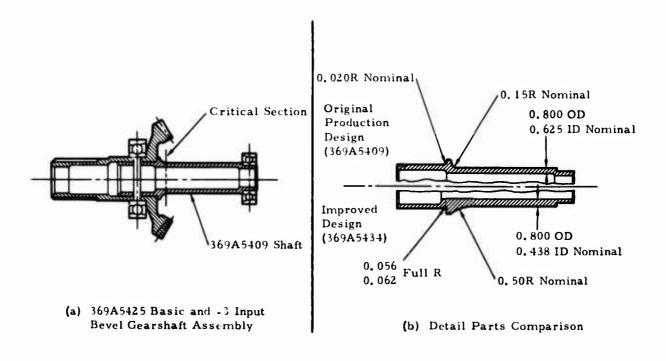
Design Improvements to the Critical Fatigue Section on the 369A5425 Input Bevel Gearshaft Assembly.
